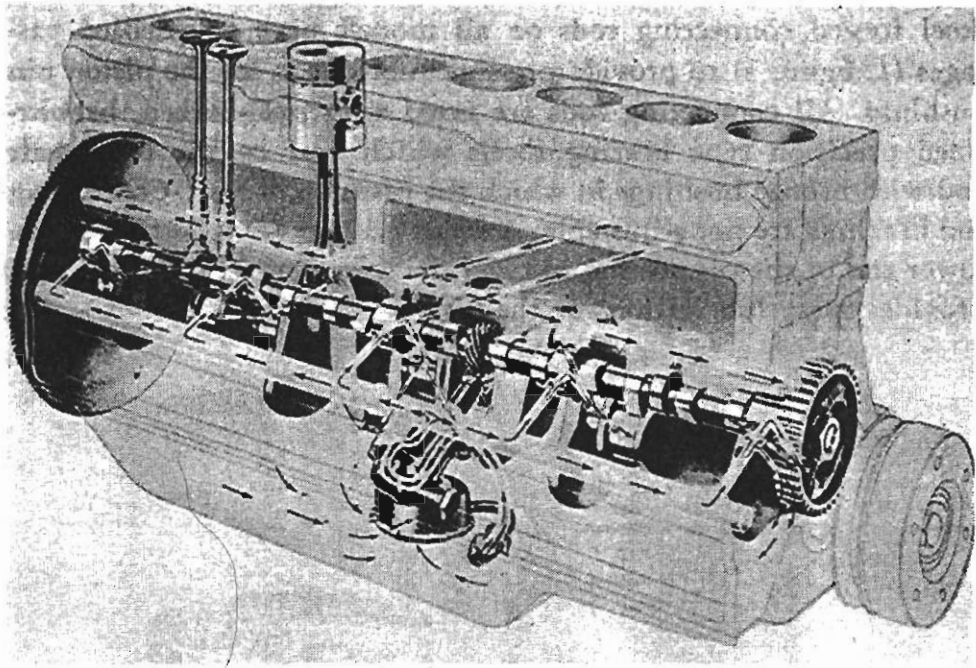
Cutaway View of Packard Eight Engine Showing the Full Pressure Lubrication System.
